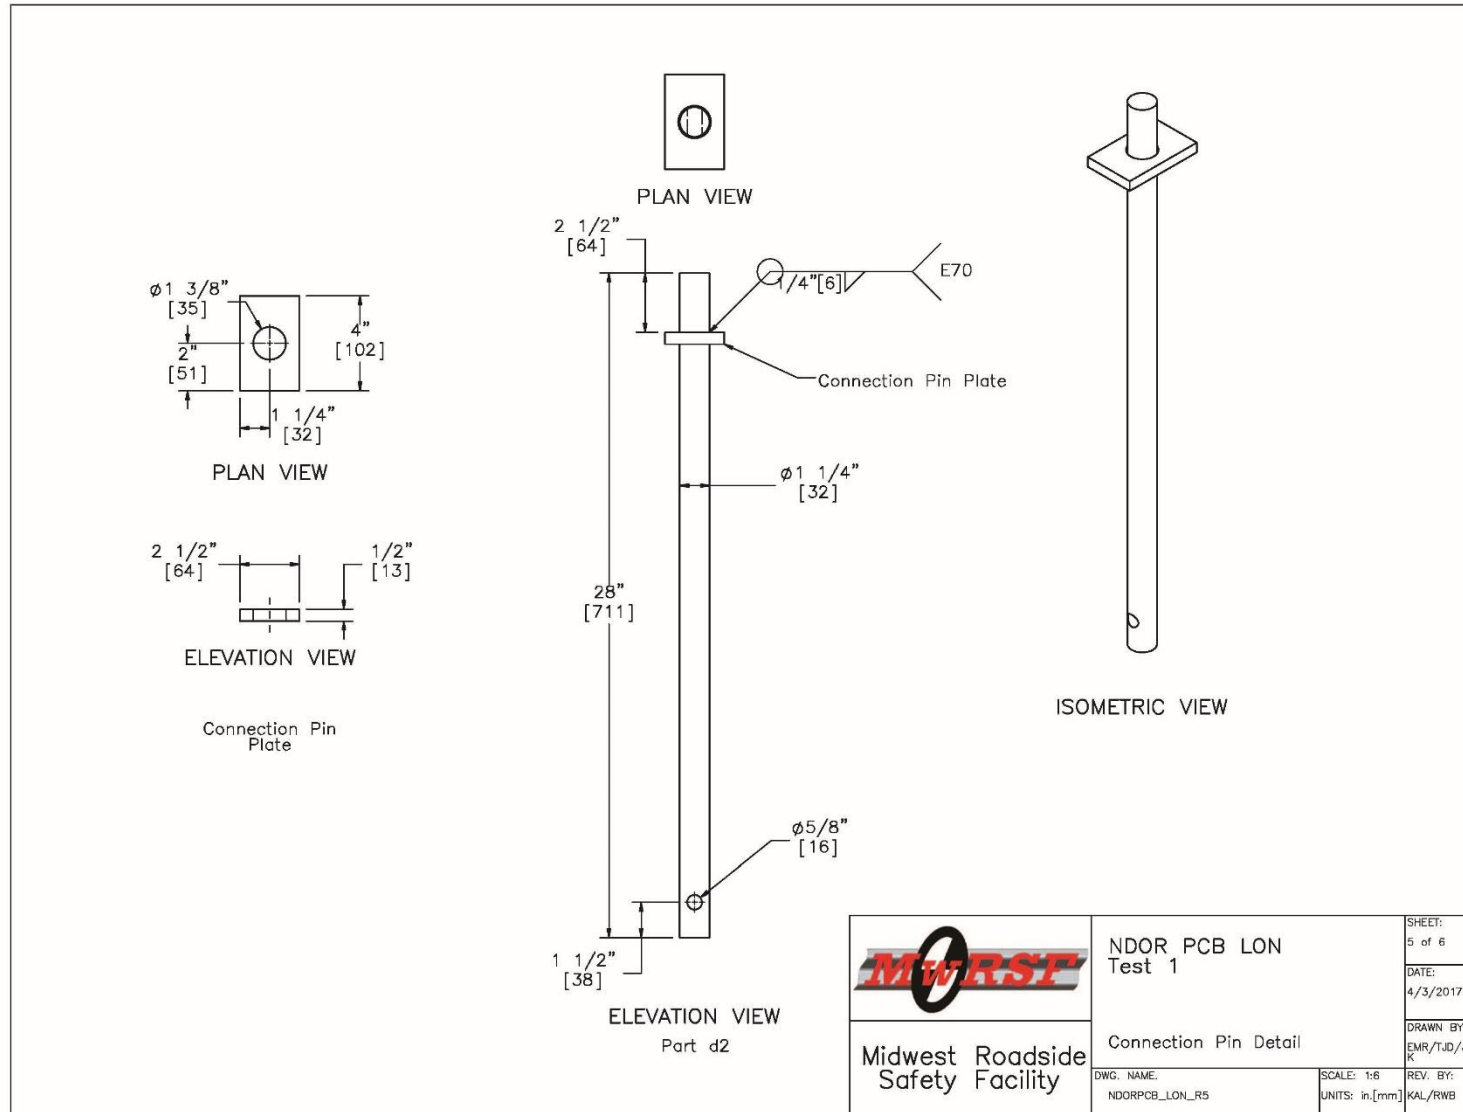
Connection Pin Detail, Test Nos. NELON-1 and NELON-2
